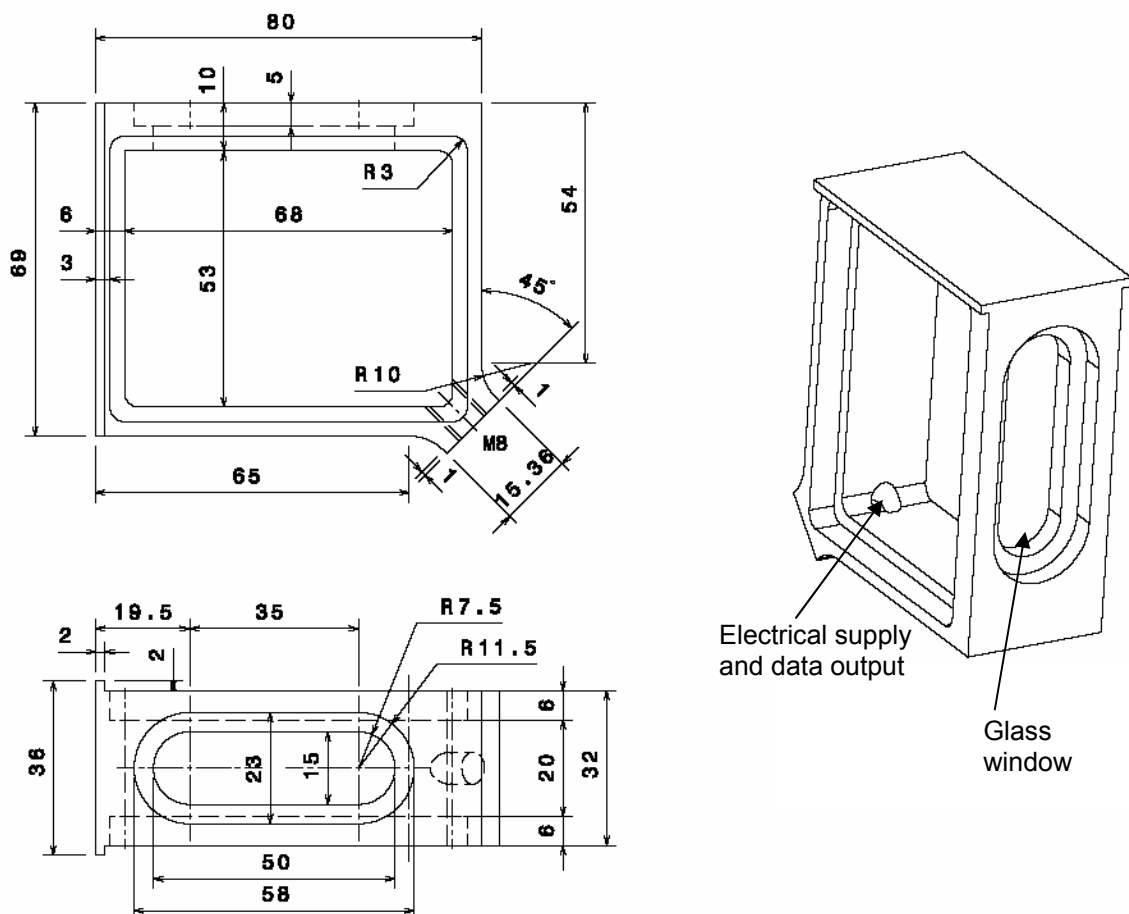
Laser housing, dimensions in millimetre (drawing by A. Zweidler).
